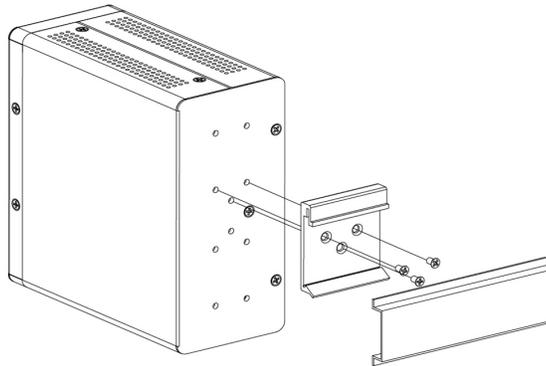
Attach the DIN Rail Bracket to the Switch's Rear Panel
